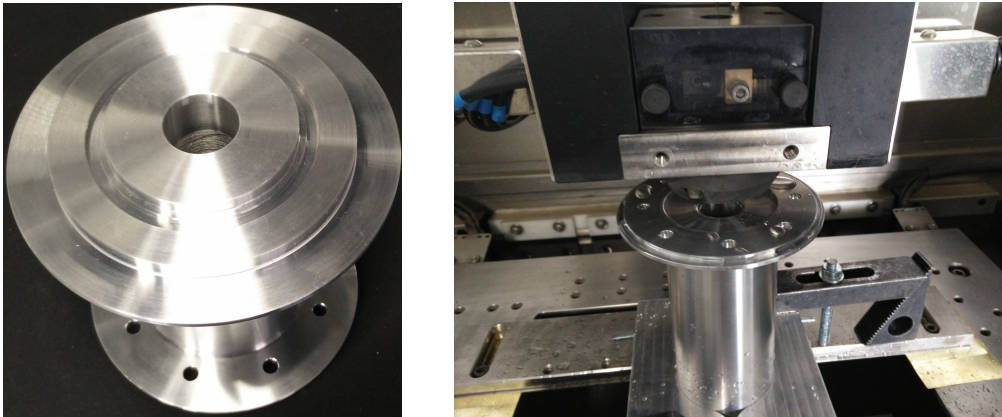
Photograph of the 114 mm section prior to machining (left) and the 200 mm section mounted in the EDM machine (right).
